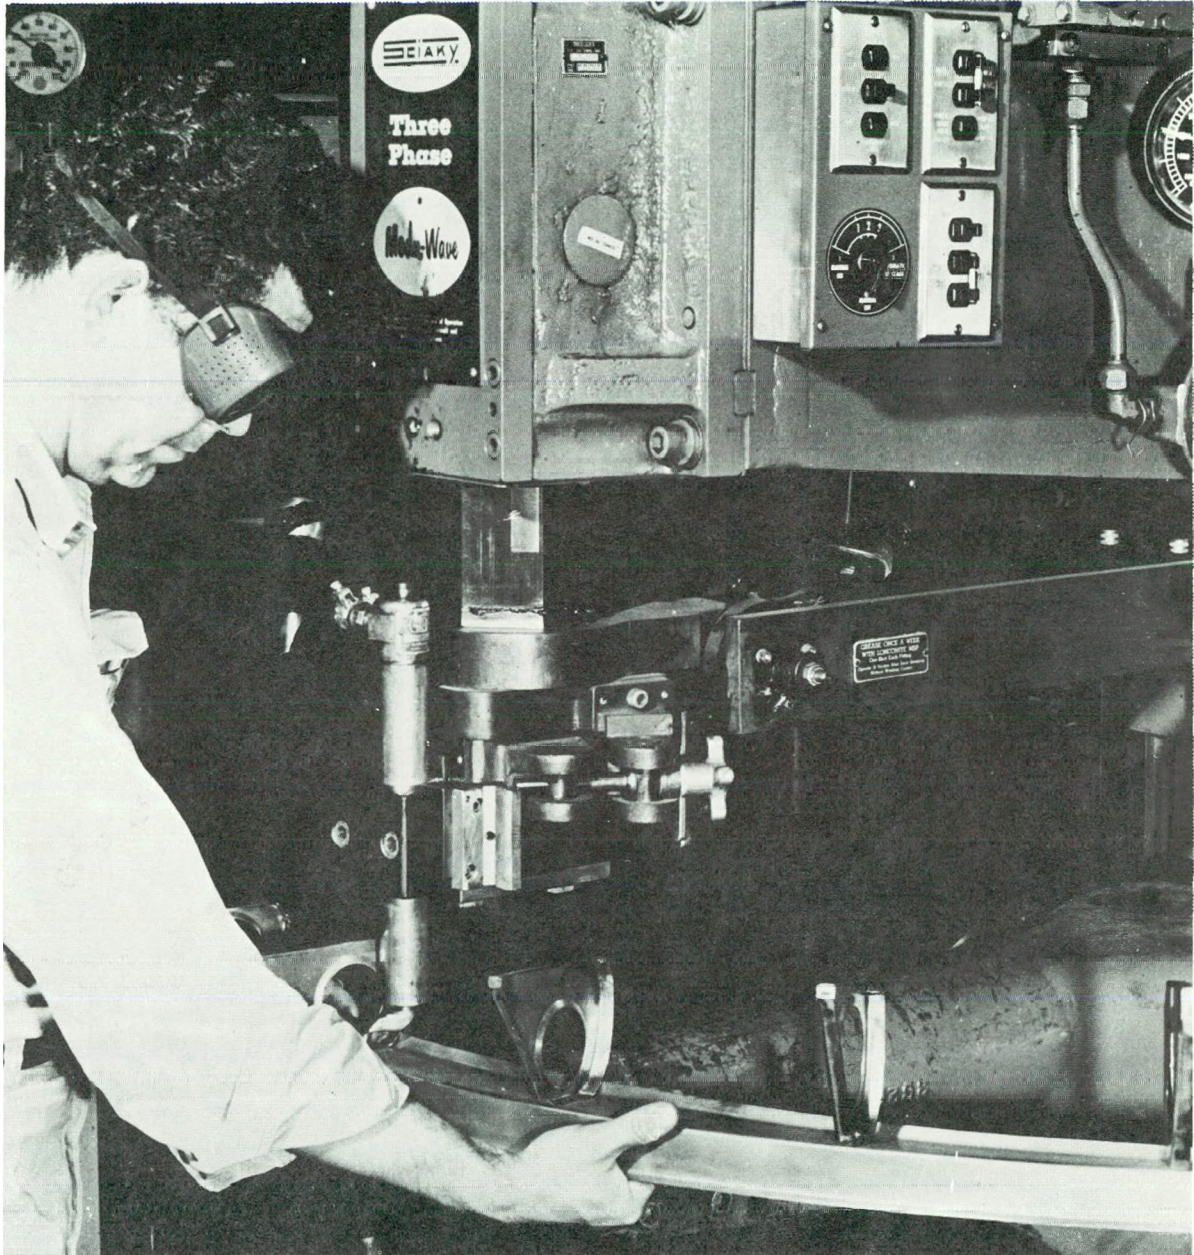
SPOT WELDING ECONOMICALLY FABRICATES A LIGHTWEIGHT HIGH-STRENGTH AIRCRAFT PART MADE OF 17-7 PH PRECIPITATION-HARDENING STAINLESS STEEL (Ref. 55)
